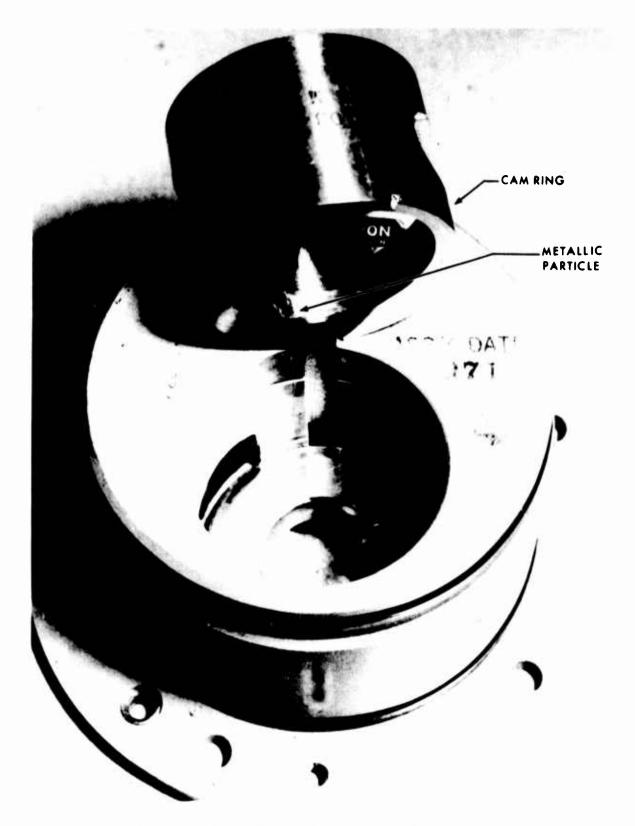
Disassembled Lubrication Pump - Roller Gear Transmission.
